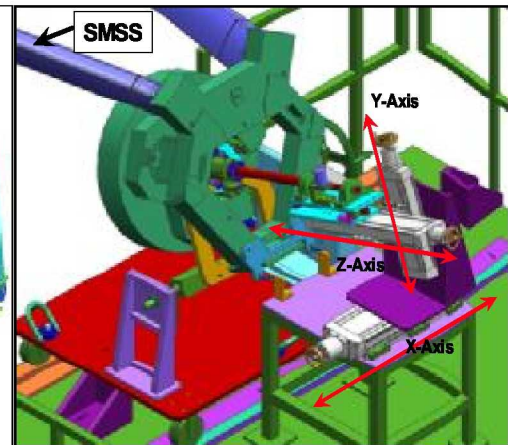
Secondary Mirror Alignment and Integration Fixture (SAIF)
